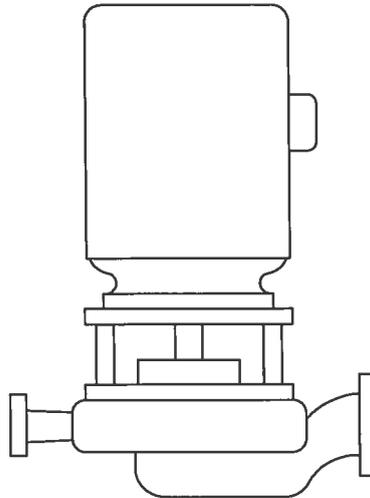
Pump type OH5: Vertical, in-line mounted, single stage, close coupled to the driver shaft
